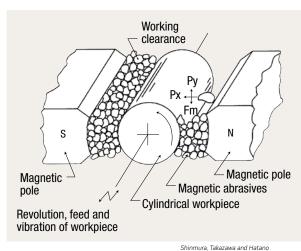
Lathe-based magnetic abrasive finishing for cylindrical workpieces.
